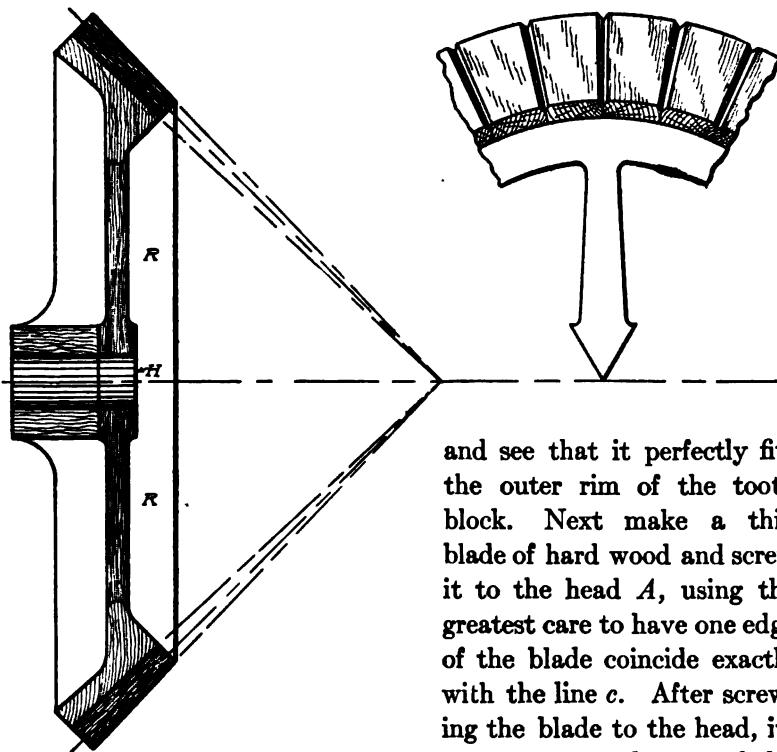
Section of Miter Gear, Showing Stock Assembled for Teeth
